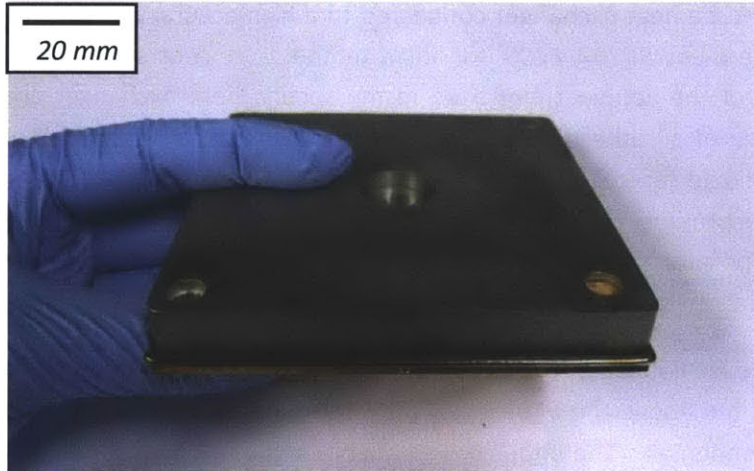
Completed evaporator, showing the fusion-welded seam between the Monel 400 case and the copper baseplate.
